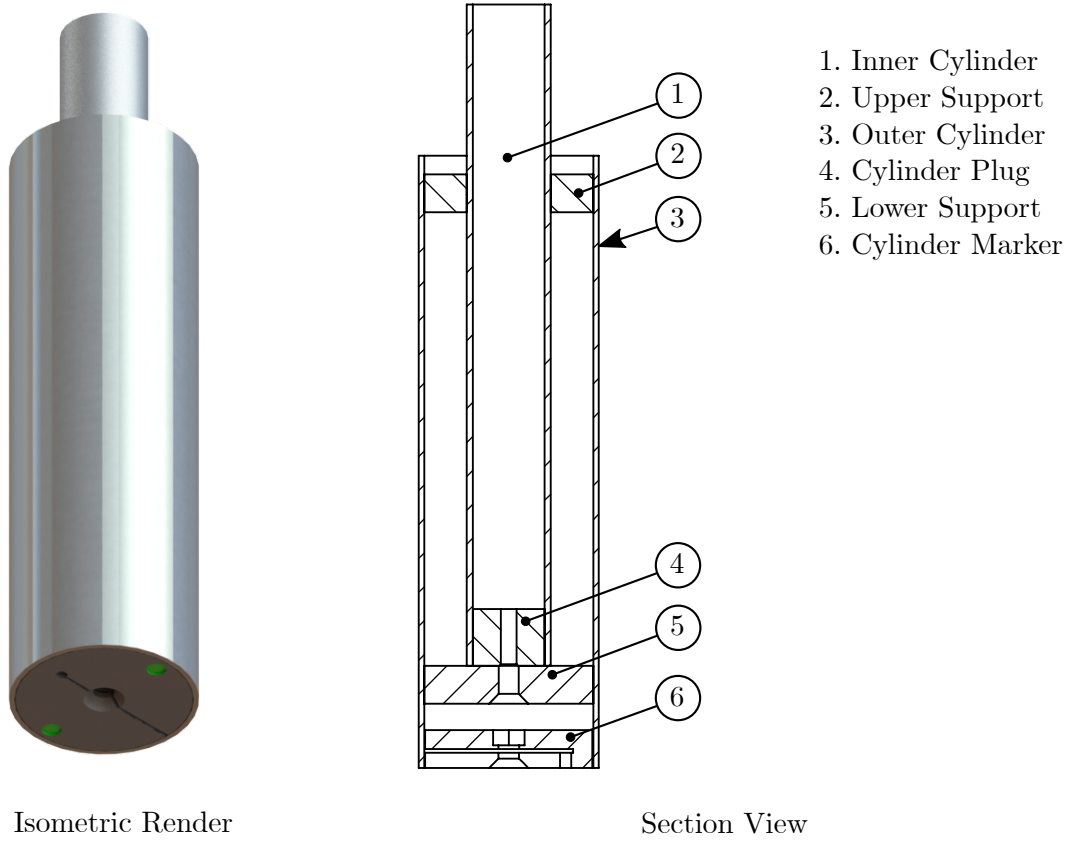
Isometric and Section views of Cylinder Assembly.
